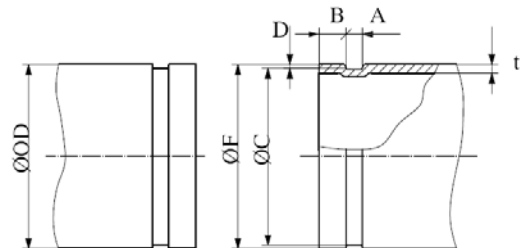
Roll Grooved-End Dimensional Reference Points for Table 1
